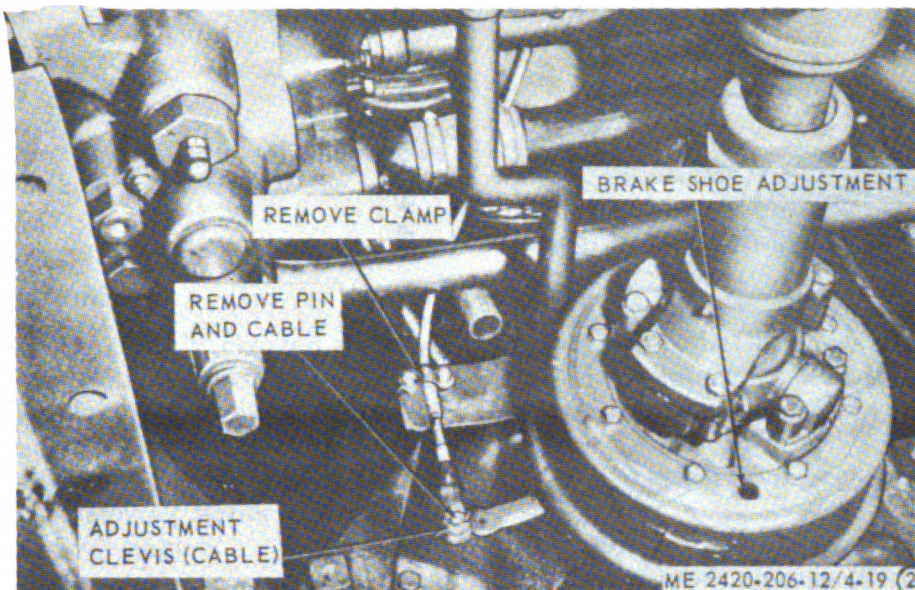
Parking brake hand lever and cable, removal and installation (sheet 2 of 2).
